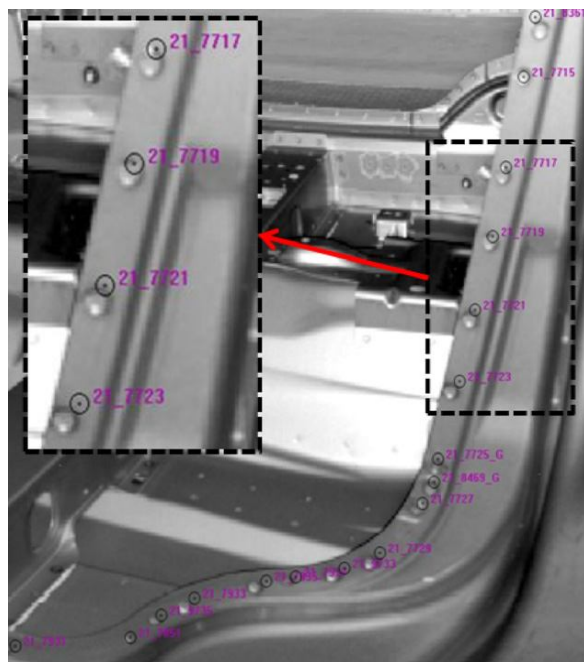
The actual spot weld position compared to nominal spot weld position (indicated with black circles) [1].
